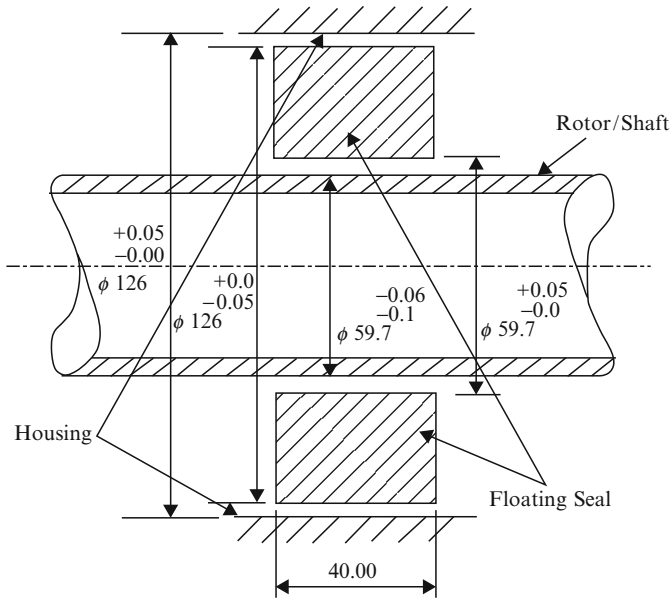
Tolerances between shaft, floating seal, and housing
